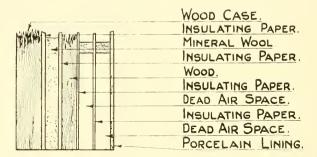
TYPICAL REFRIGERATOR WALL CONSTRUCTION
